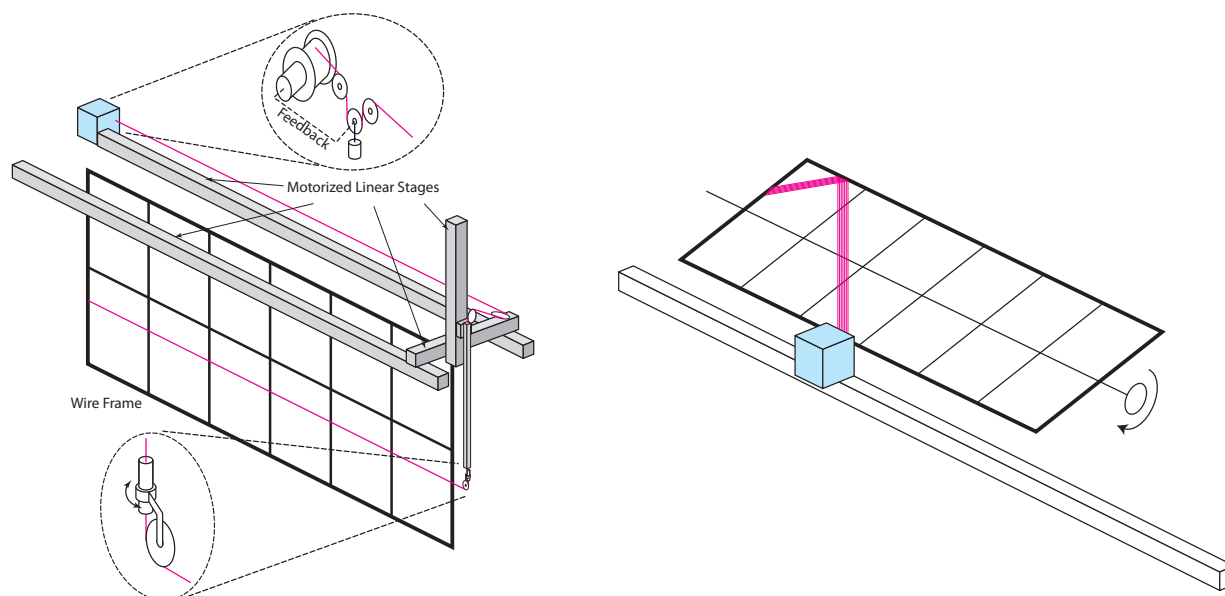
Two winding machine concepts. The left figure is for the X and shielding wires, the right figure is for the U & V wires. The 'blue boxes' are wire spools with automatic tension control.
